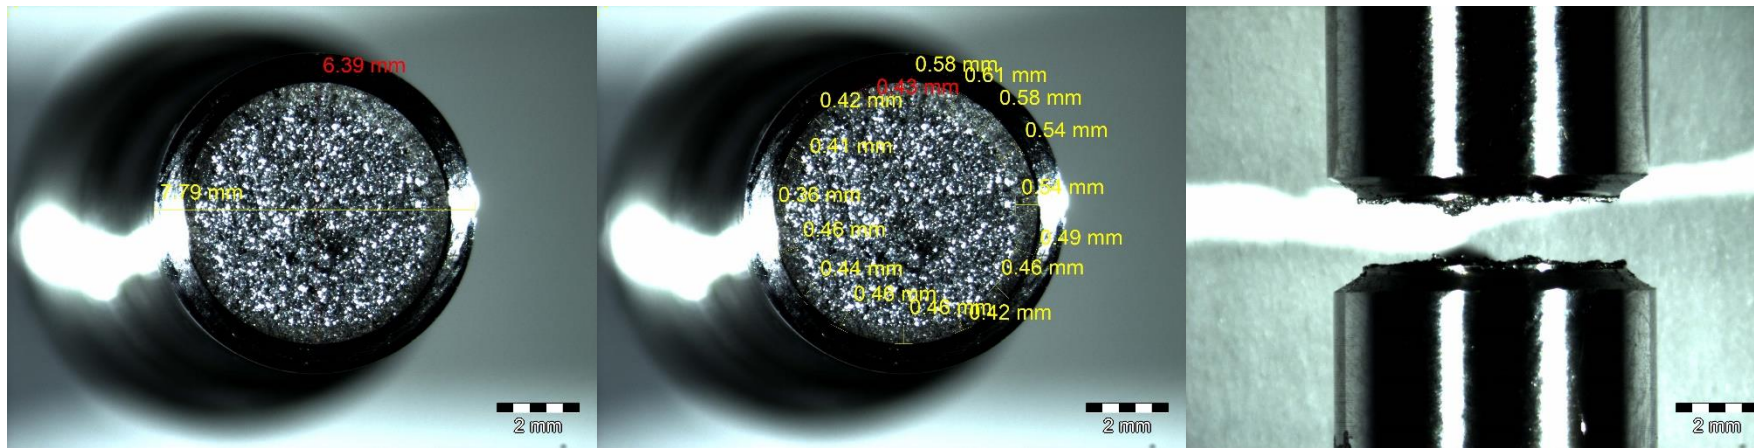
Cross-sectional and side view of fractured ECCRБ-01
